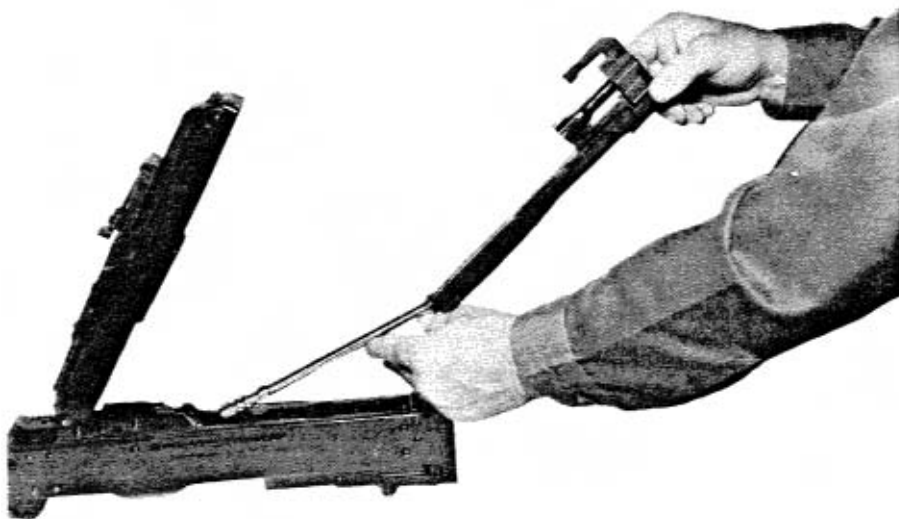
INSERTING CARRIER BLOCK AND GAS PISTON INTO RECEIVER
